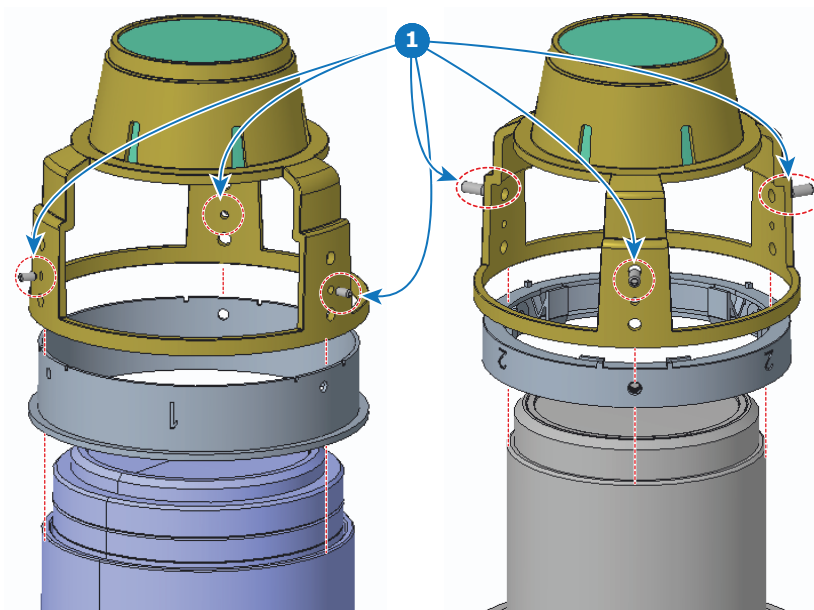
Two examples of mounting the optical adapter. One with lens ring 1 (left) or lens ring 2 on the end position (right)
